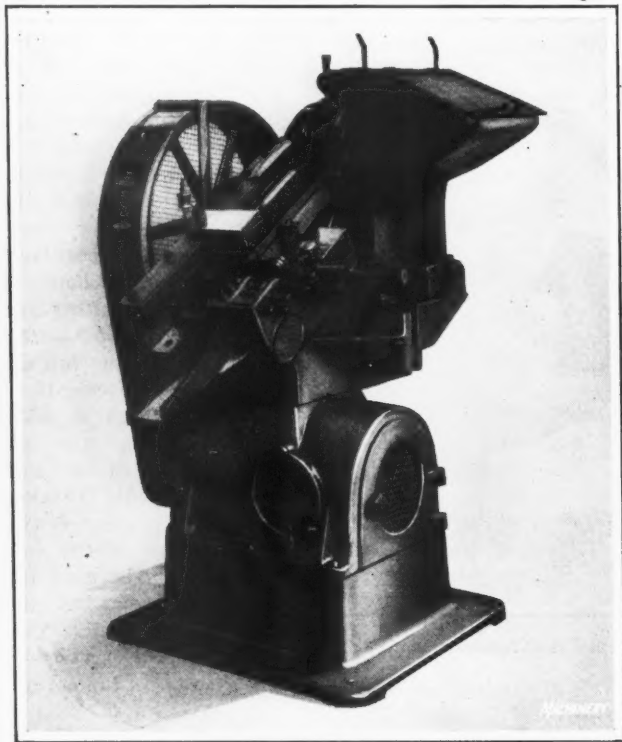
Reciprocating Screw-thread Rolling Machine furnished with an Enclosed Motor Drive
